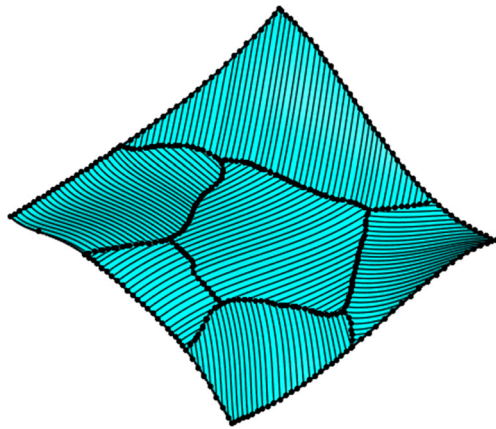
3 + 2-axis machining toolpaths for the surface in Fig. 3
